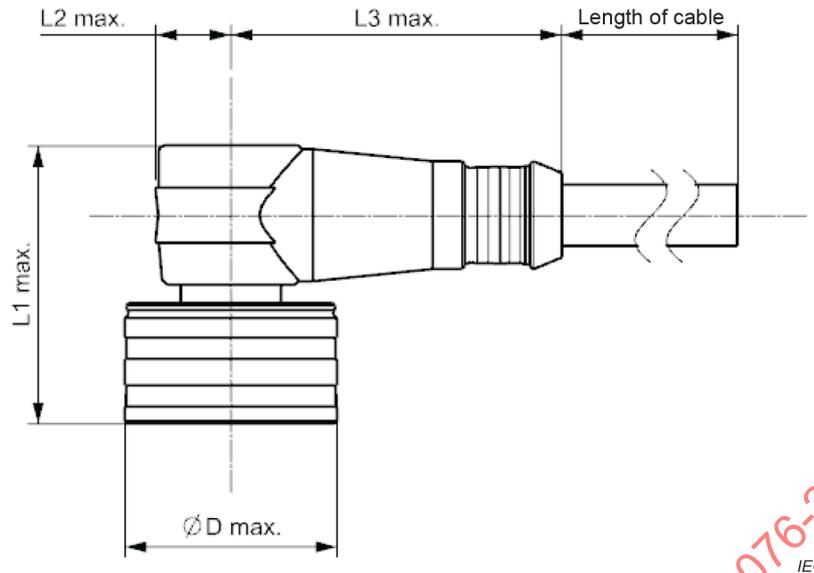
Non-rewireable connector, female contacts, angled version, with outer push-pull locking
